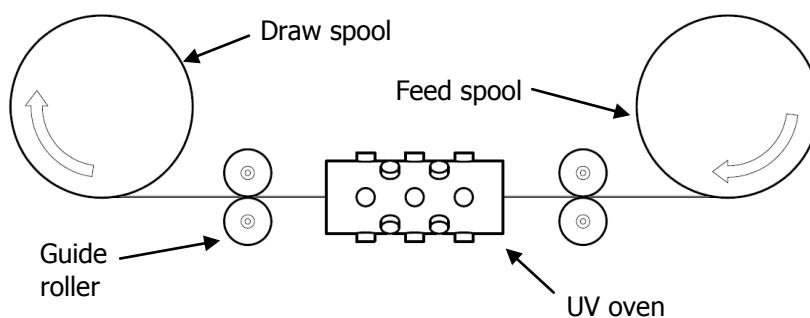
Schematic of UV/IR oven, guide rollers and spool assembly.
